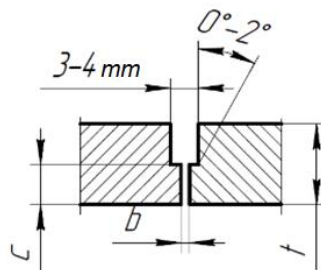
Special tapered (narrow-slotted) groove in multi-run laser welding:
